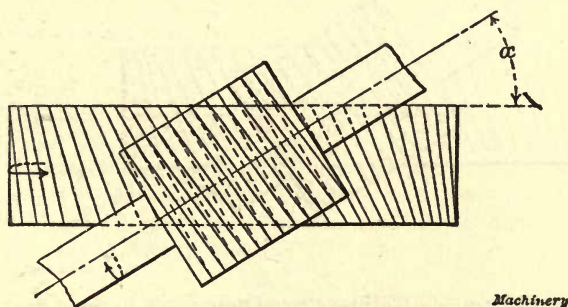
Cutting a Left-hand Spiral Gear with a Right-hand Hob
